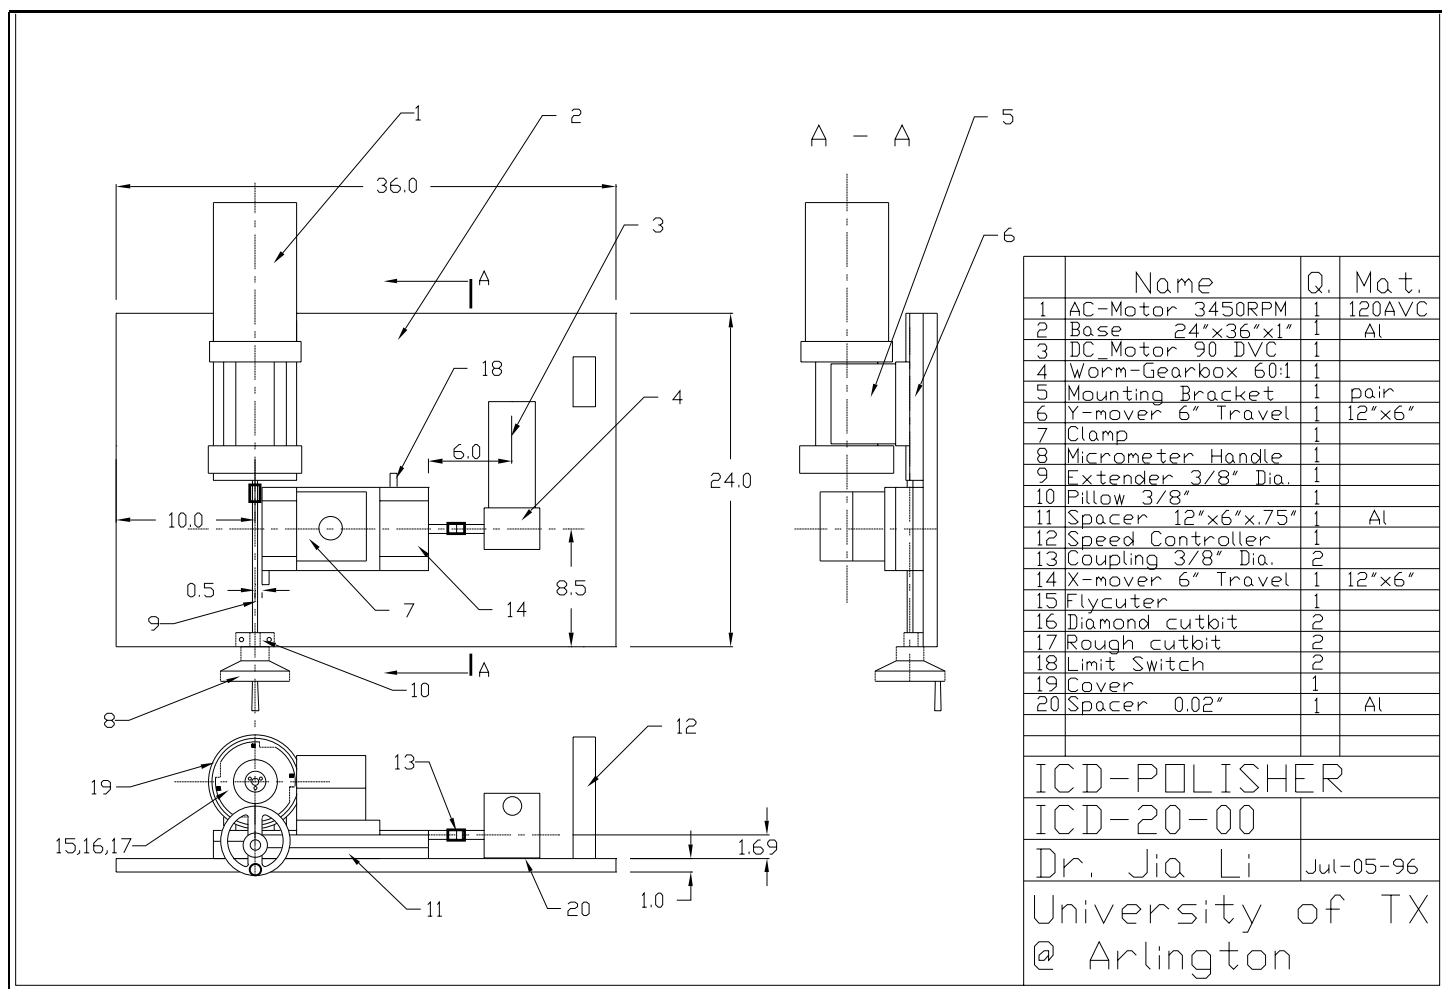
Assembly schematic of UTA fiber and connector polisher, showing major components.
